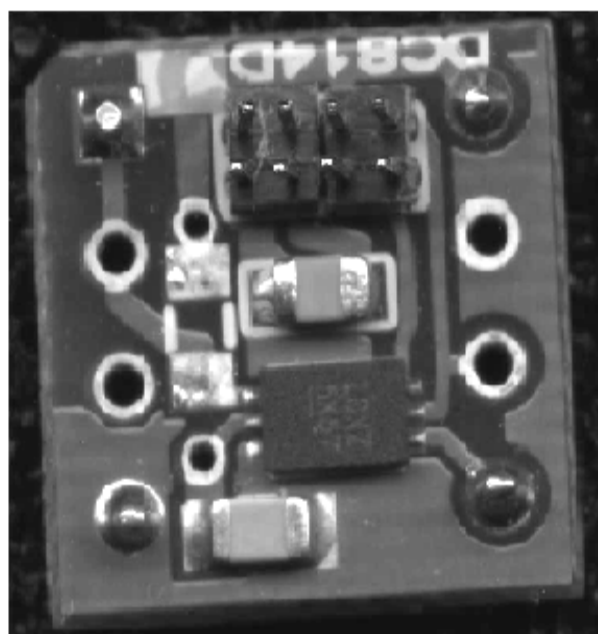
DC814D-X DIP-8 Clock Board (Top side view)
